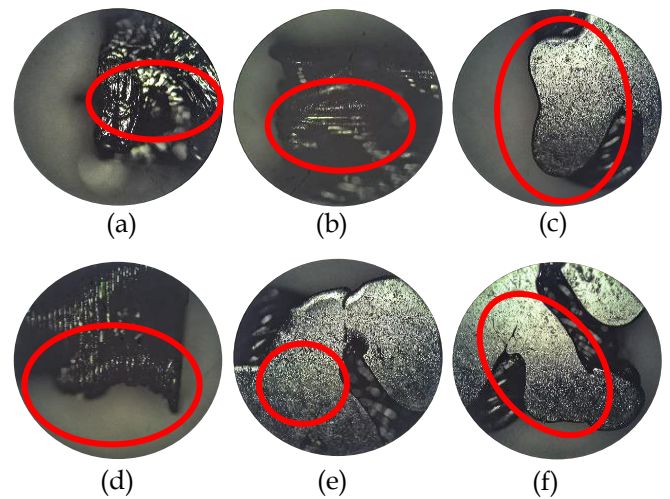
Test 3; P.S.-25 mm/s, R.S.- 45 mm/s; (a) String; (b) Layer shift; (c) Shape deformation; (d) Excessive material; (e) Voids; (f) Nonuniform layer width
